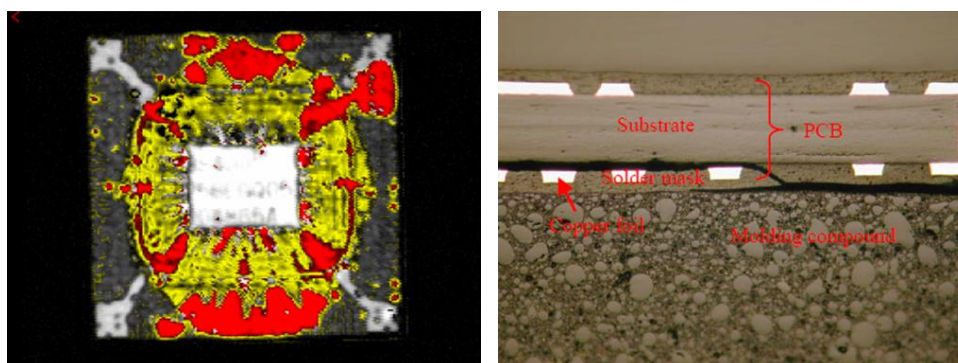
Left) Acoustic image of failed FPGA (red is delaminated). Right) Cross-section image of cracking around the PCB [31].
